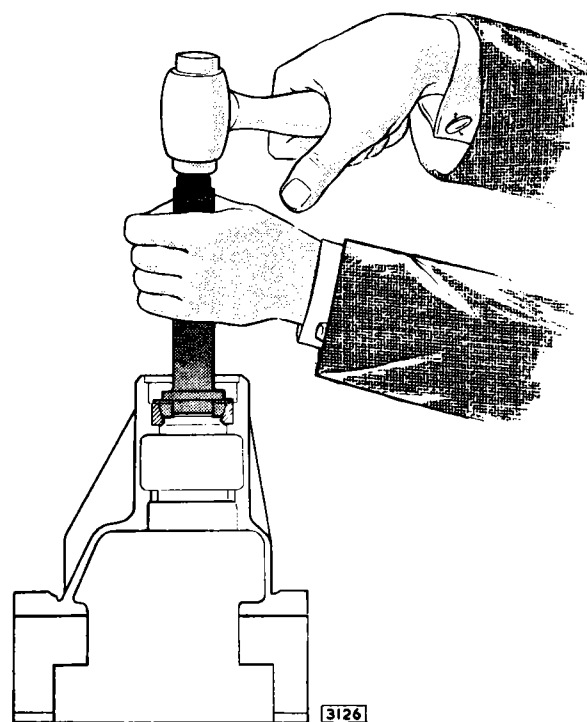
Replacing a pinion outer bearing outer race using Churchill Tool No. 550 with adaptor No. SL 550-4
